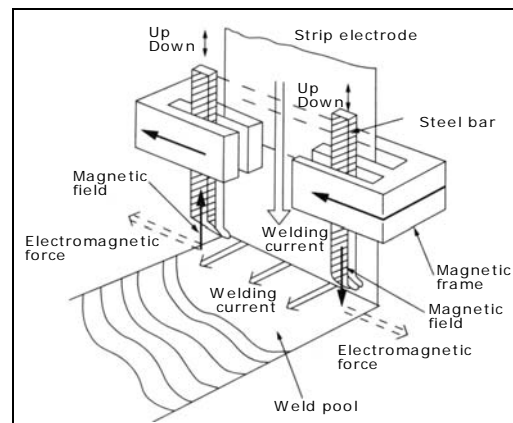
Electro-magnetically controlling welding head for Band-Overlaying
